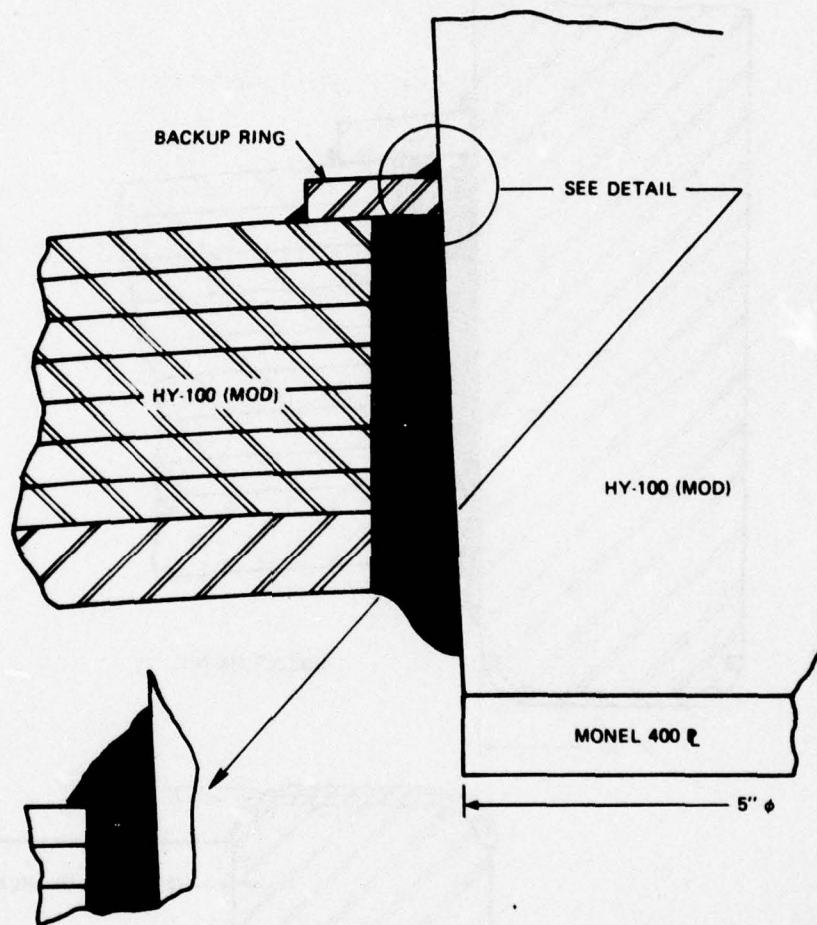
Welding Details for Welding Small Nozzles in Head
